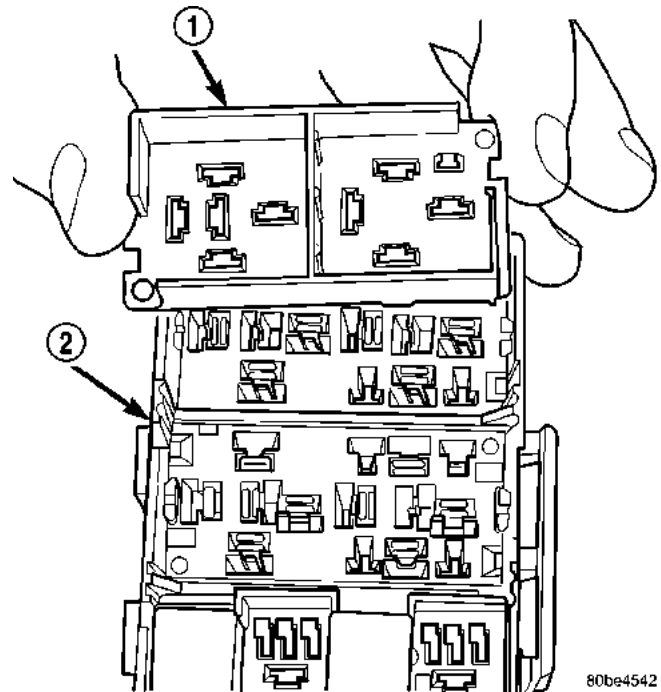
PDC Relay Wedge Remove/Install - Typical
